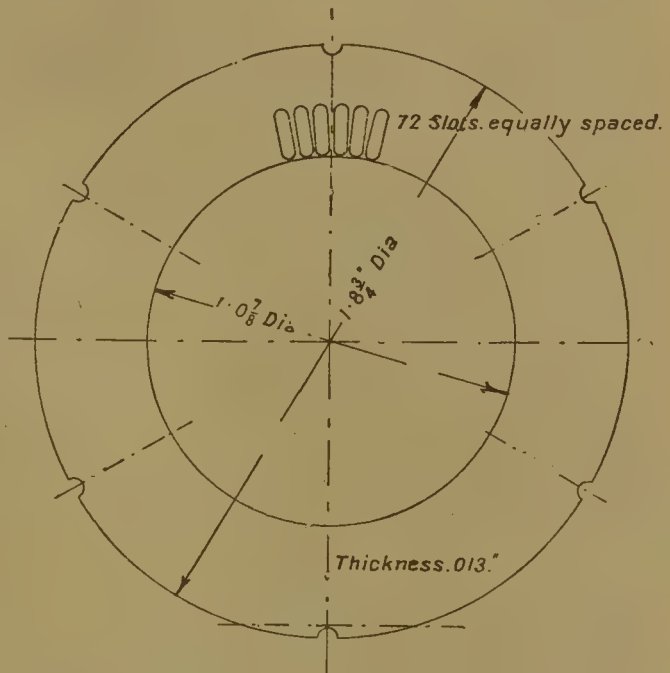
Stator Stamping for 25 B. H. P. Motor.
